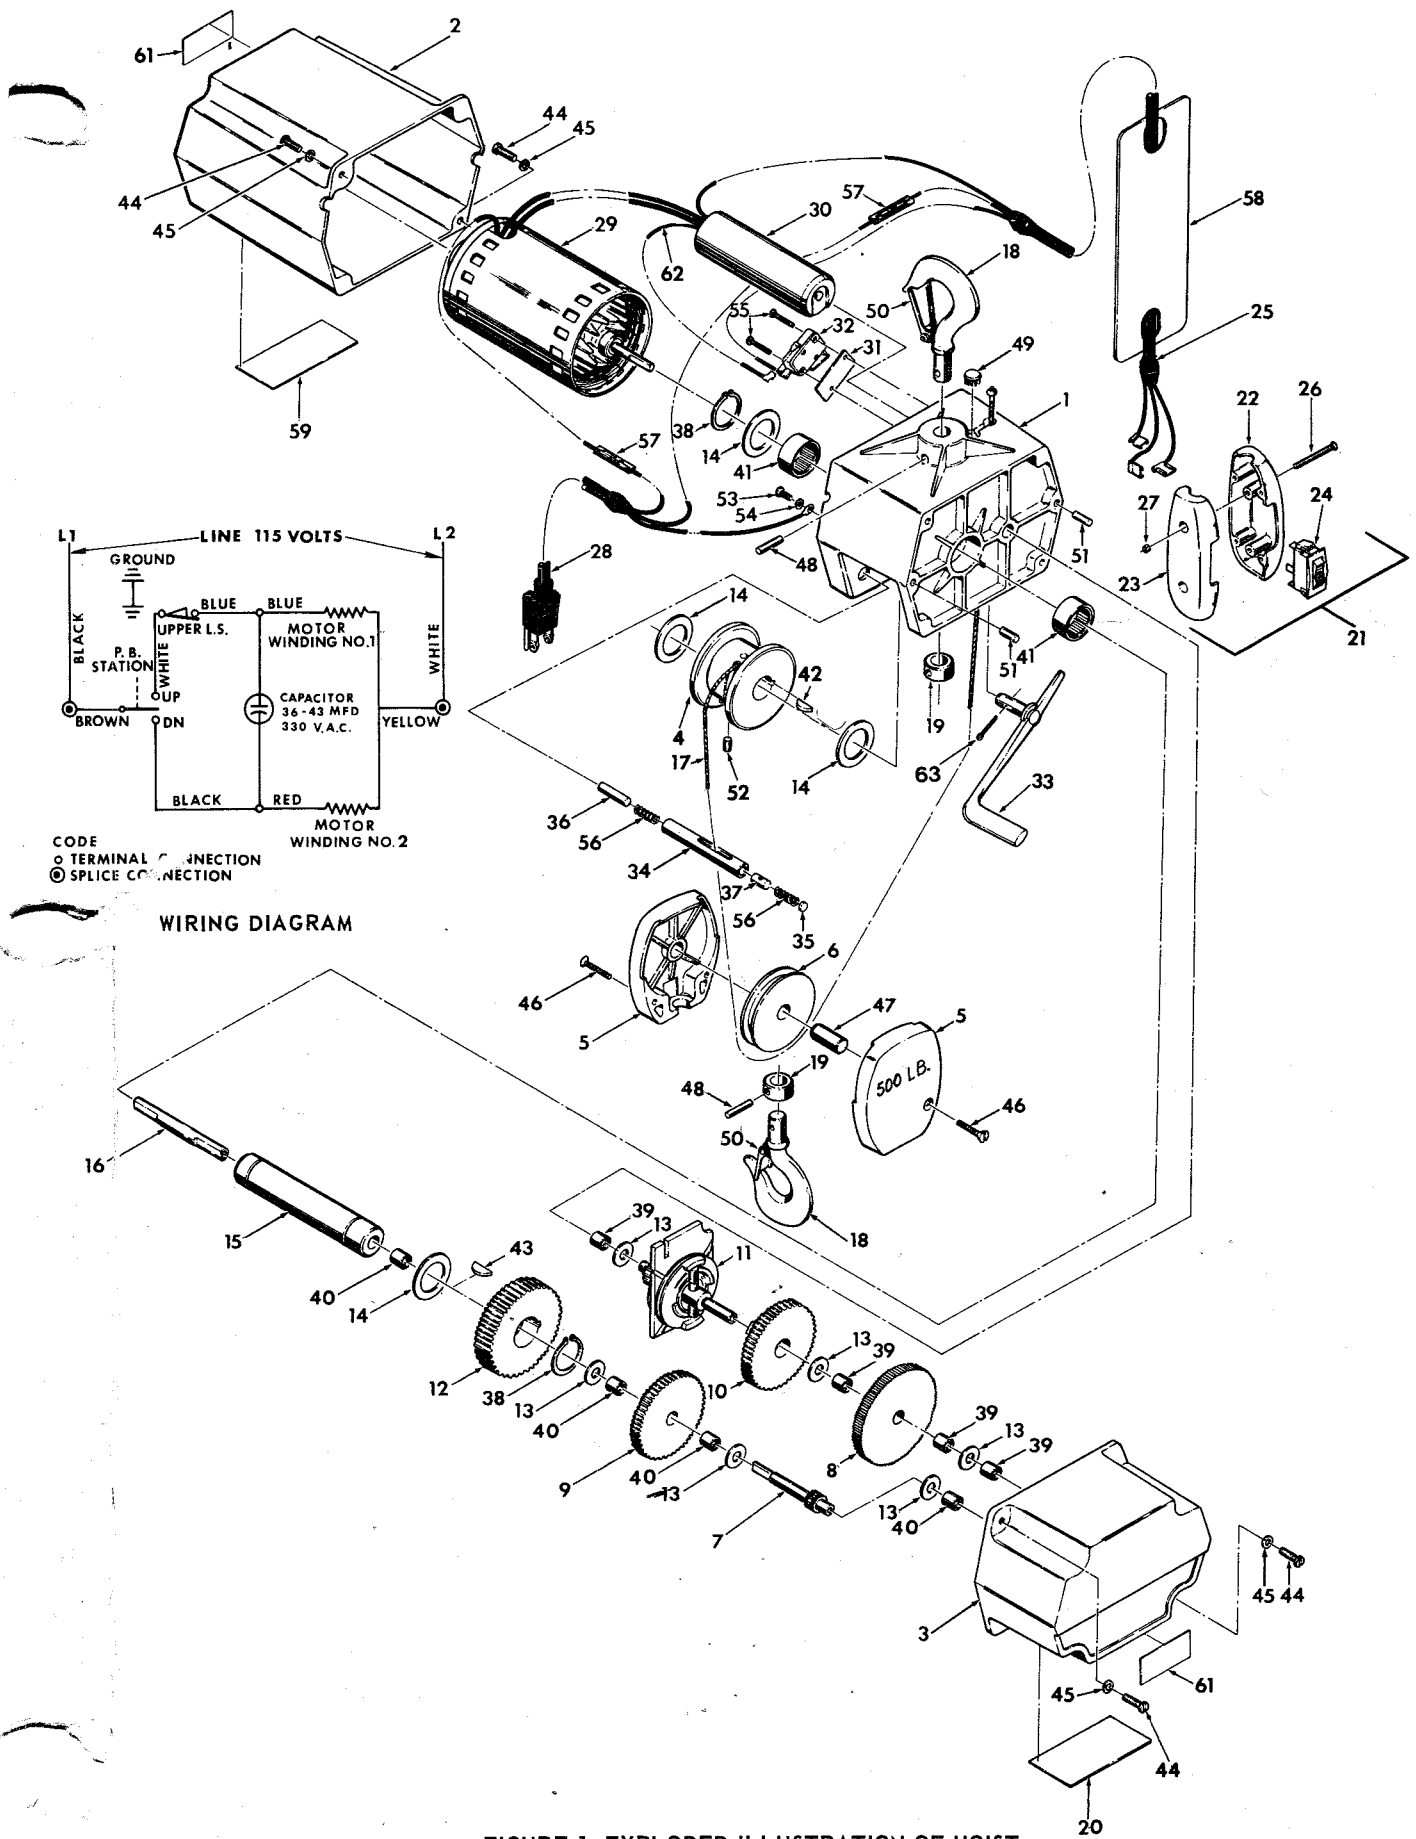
EXPLODED ILLUSTRATION OF HOIST
